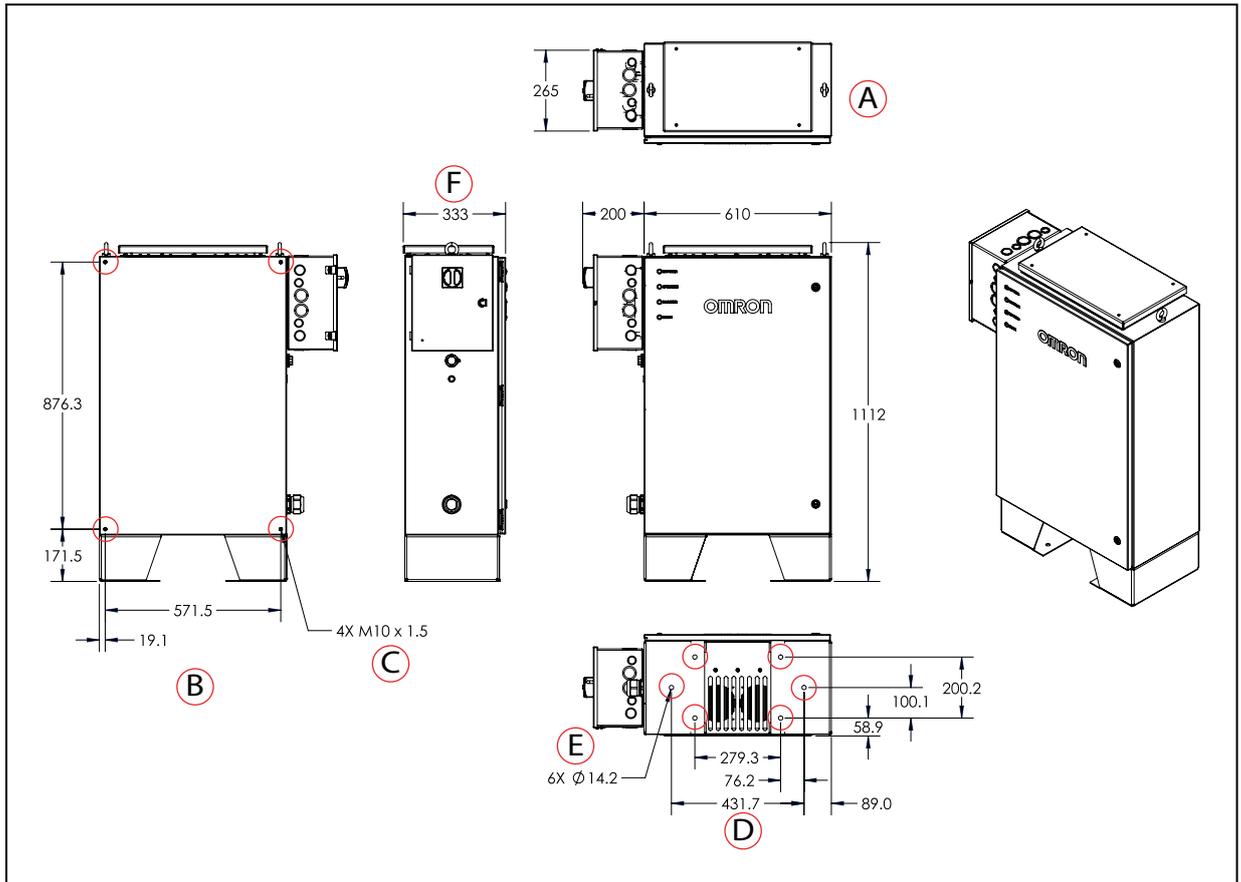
Power Supply Box Dimensions, (A) Top View, (B) Back View, (C) Wall Mount Holes, (D) Bottom View, (E) Floor Mount Holes, and (F) Side View (units are in mm)
